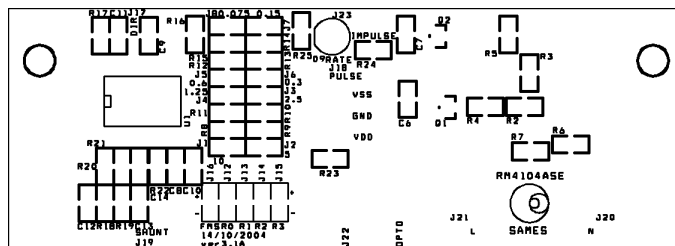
PCB Silkscreen Top Layer (Scale 1:1)
